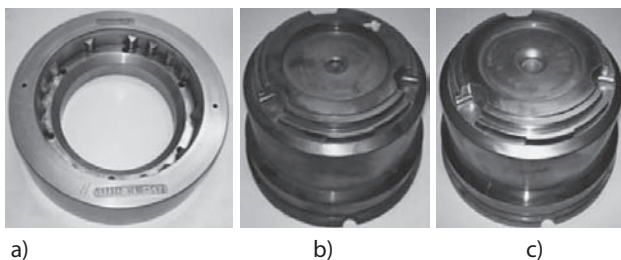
The set of forging tools used in the investigation: a) die, b) punch I, c) punch II
